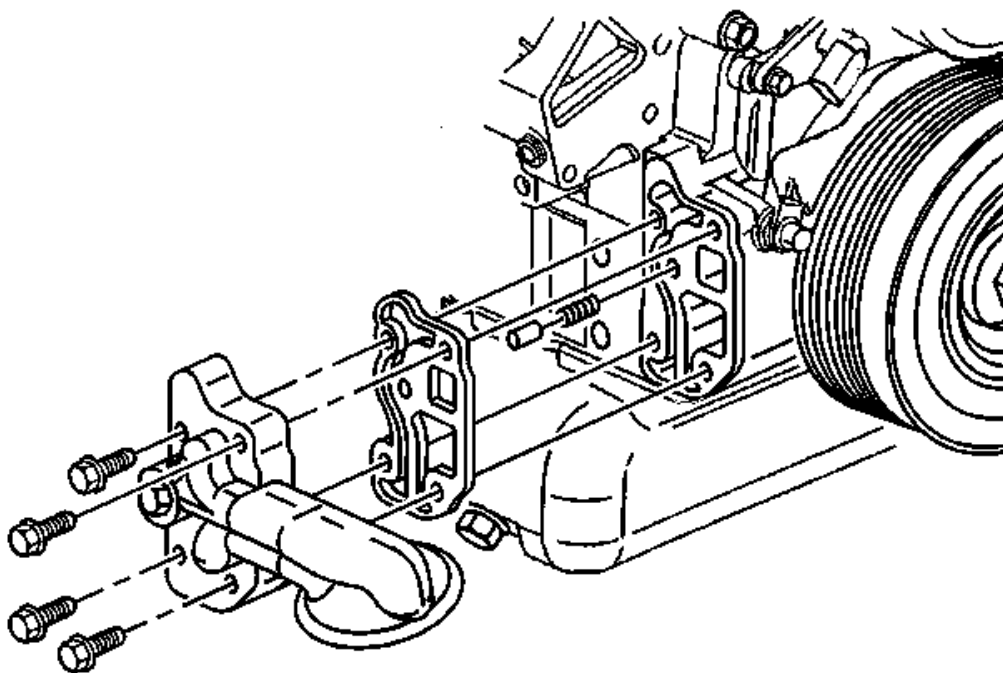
Removing/Installing Oil Filter Adapter & Pressure Relief Valve
